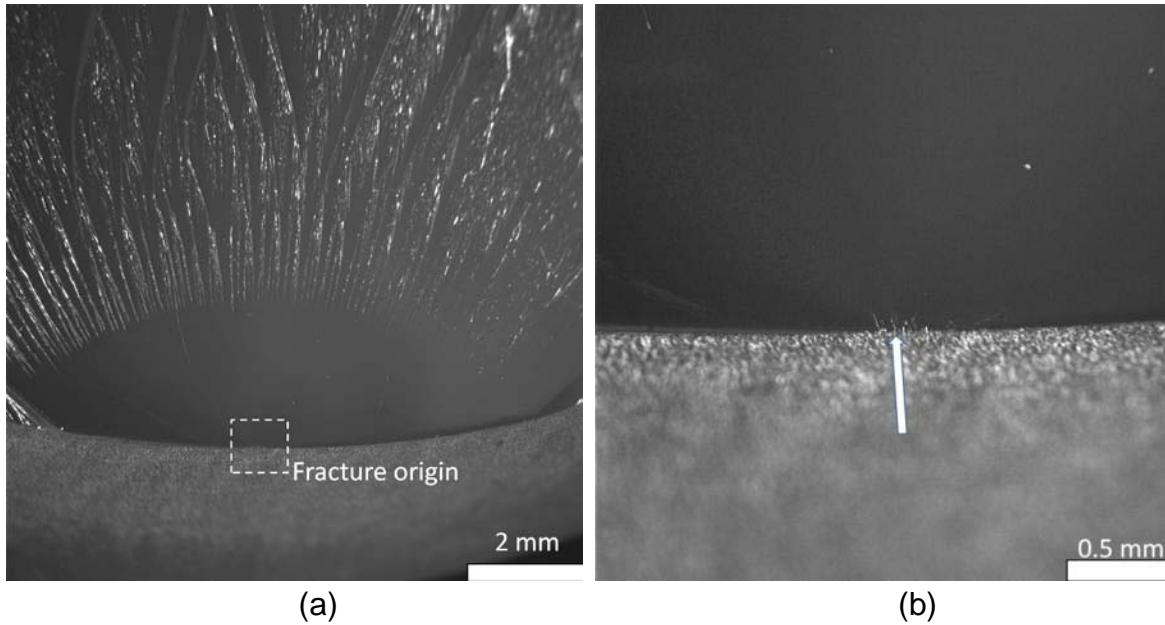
Images showing (a) the fracture surface and (b) the fracture origin of sample GB3-1.
